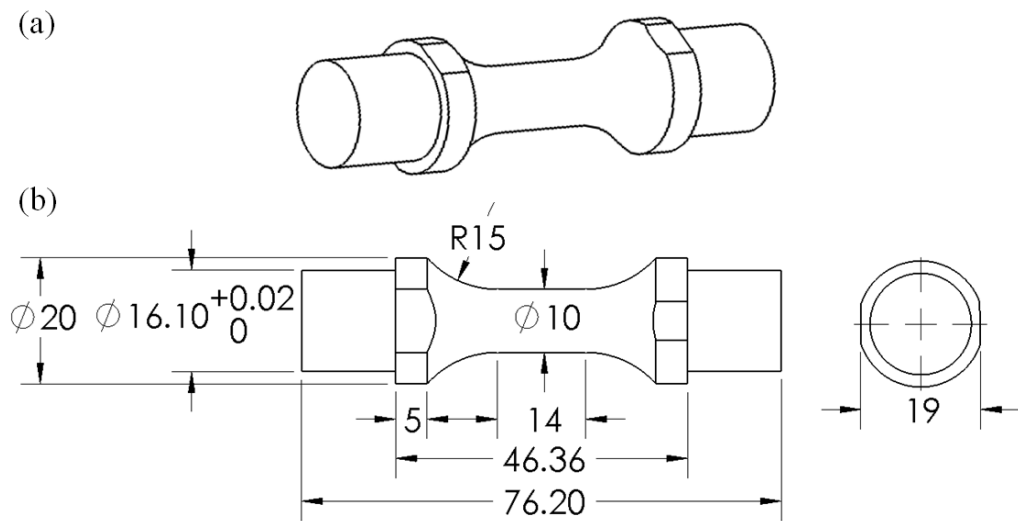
Schematics of specimen for monotonic compression experiments with dimensions: (a) Schematic illustration and (b) engineering drawing with dimensions.
